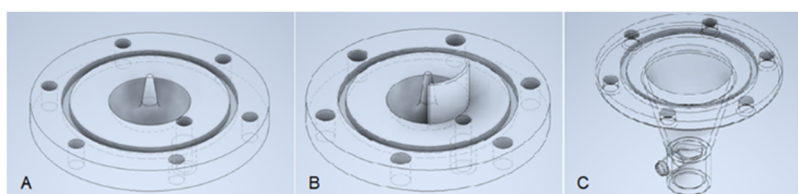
Evolutionary design steps taken for designing the bottom part of the crystallizer: Hemisphere-shaped cavity + central pin (A), hemisphere-shaped cavity + central pin + baffle plate (B), conical extension with flat bottom (C).
